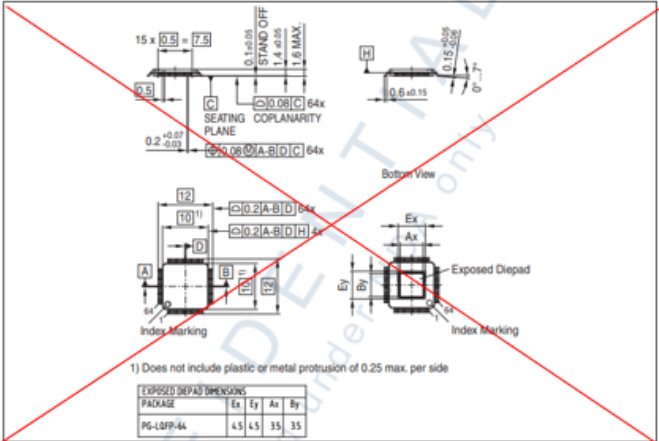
PG-LQFP-64-18 (package with u-groove will be replaced by PG-LQFP-64-27)
